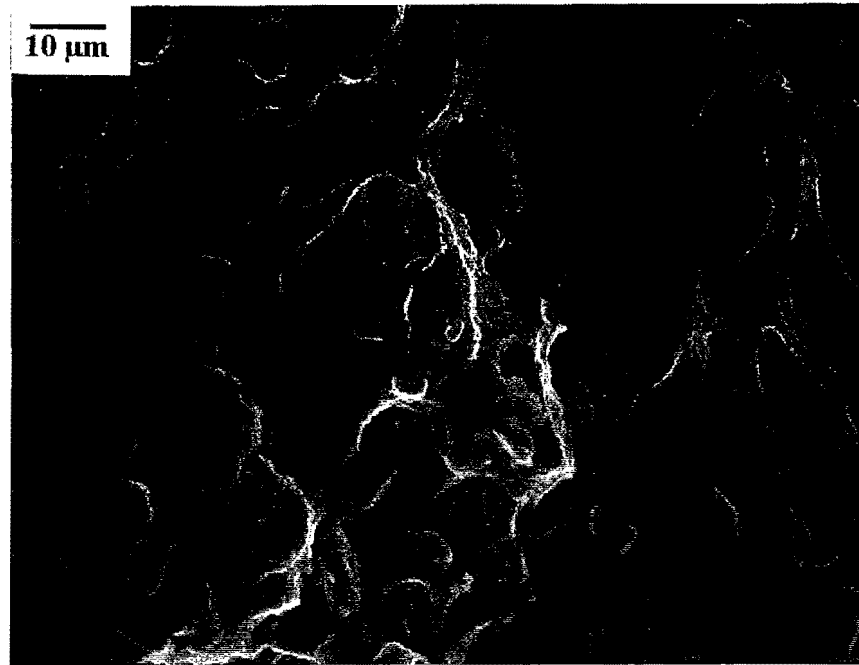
Optical micrograph at a higher magnification of the same specimen as in Figure 4.38a showing regions of ductile fracture and fatigue fracture.
